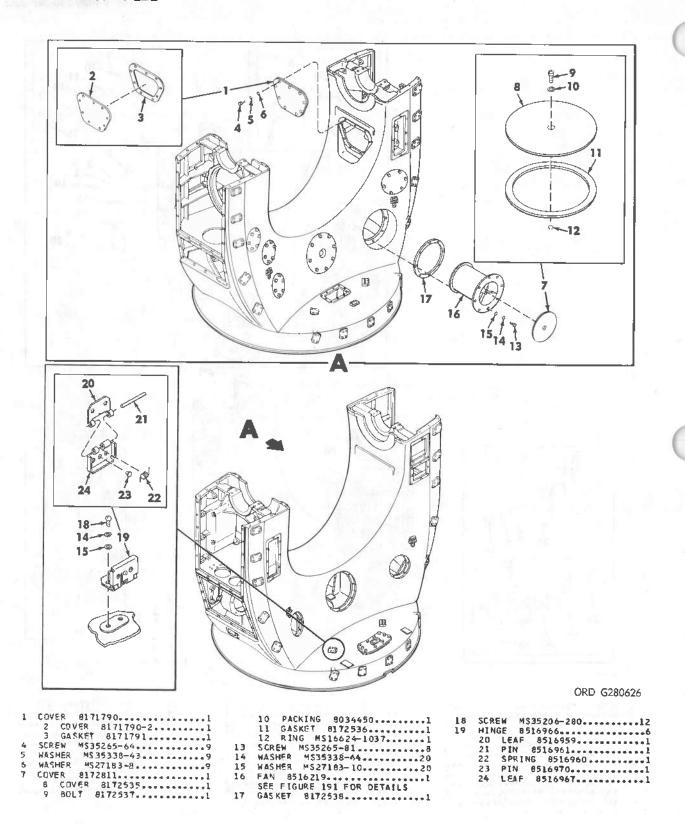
PEDESTAL, ANTENNA /8171625/-PARTIAL EXPLODED VIEW
